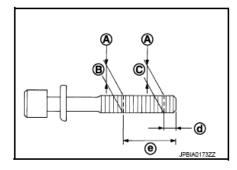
Identifying Cylinder Head Bolts Outer Diameter Courtesy of NISSAN NORTH AMERICA, INC.
